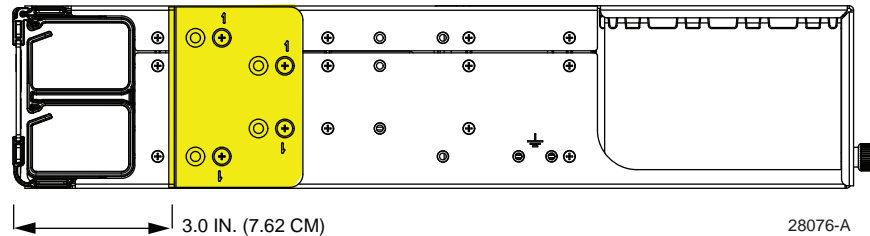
Rack Mounting Position for 3.0-Inch Recess (Shipped Panel)
